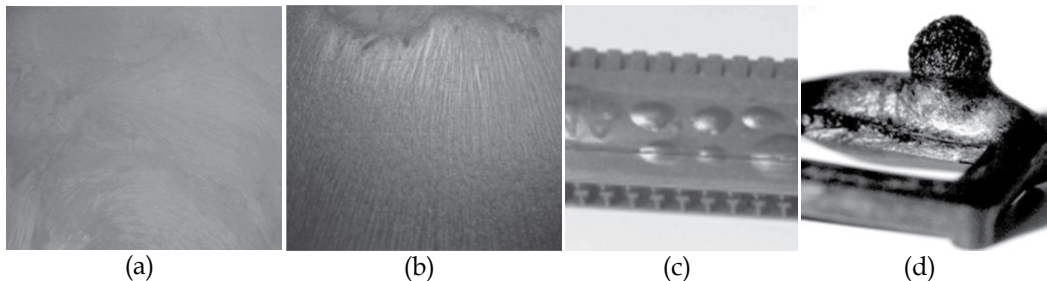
Surface defects of microcellular foam injection molding parts (a) swirl mark^[14]; (b) silver streak^[14]; (c) surface blistering^[15]; (d) post-blow^[15].
